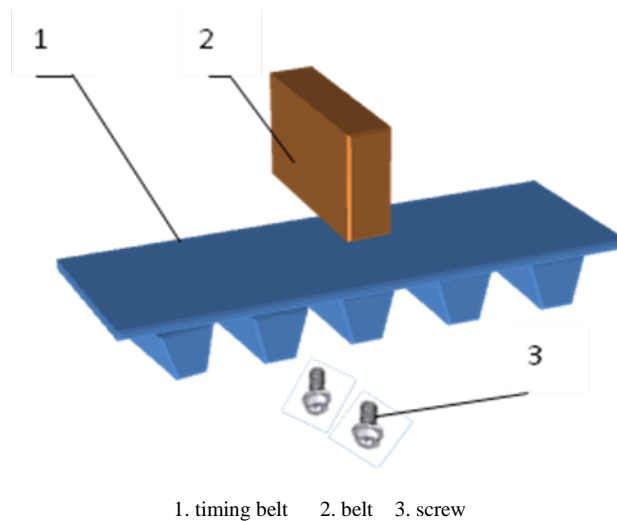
Schematic diagram of fixing metal belt tooth with screw
